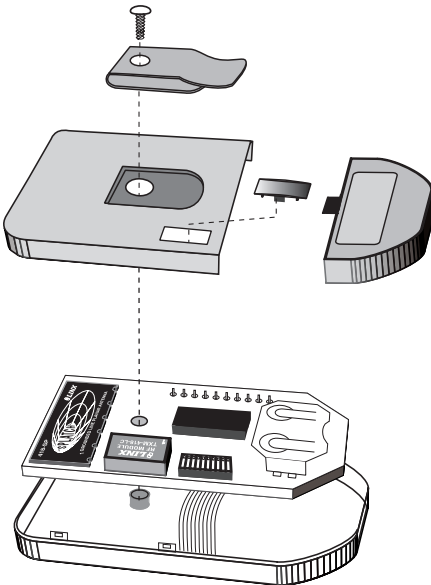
CMD-HHCP-\*\*\*-MD Assembly
